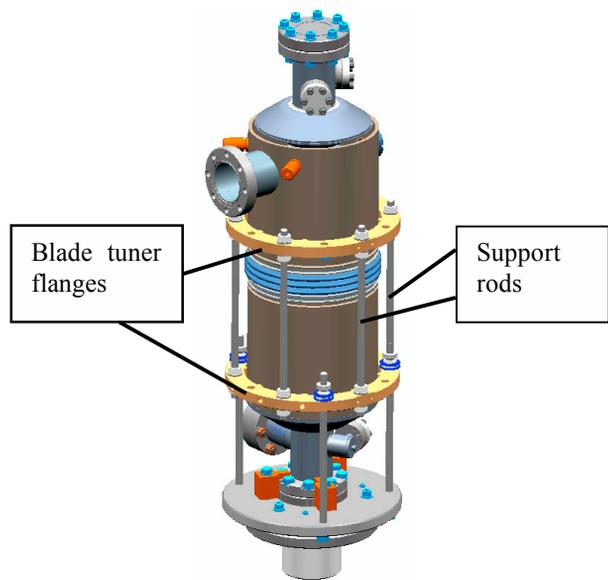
Cavity with helium vessel assembled in EB welding fixture.
